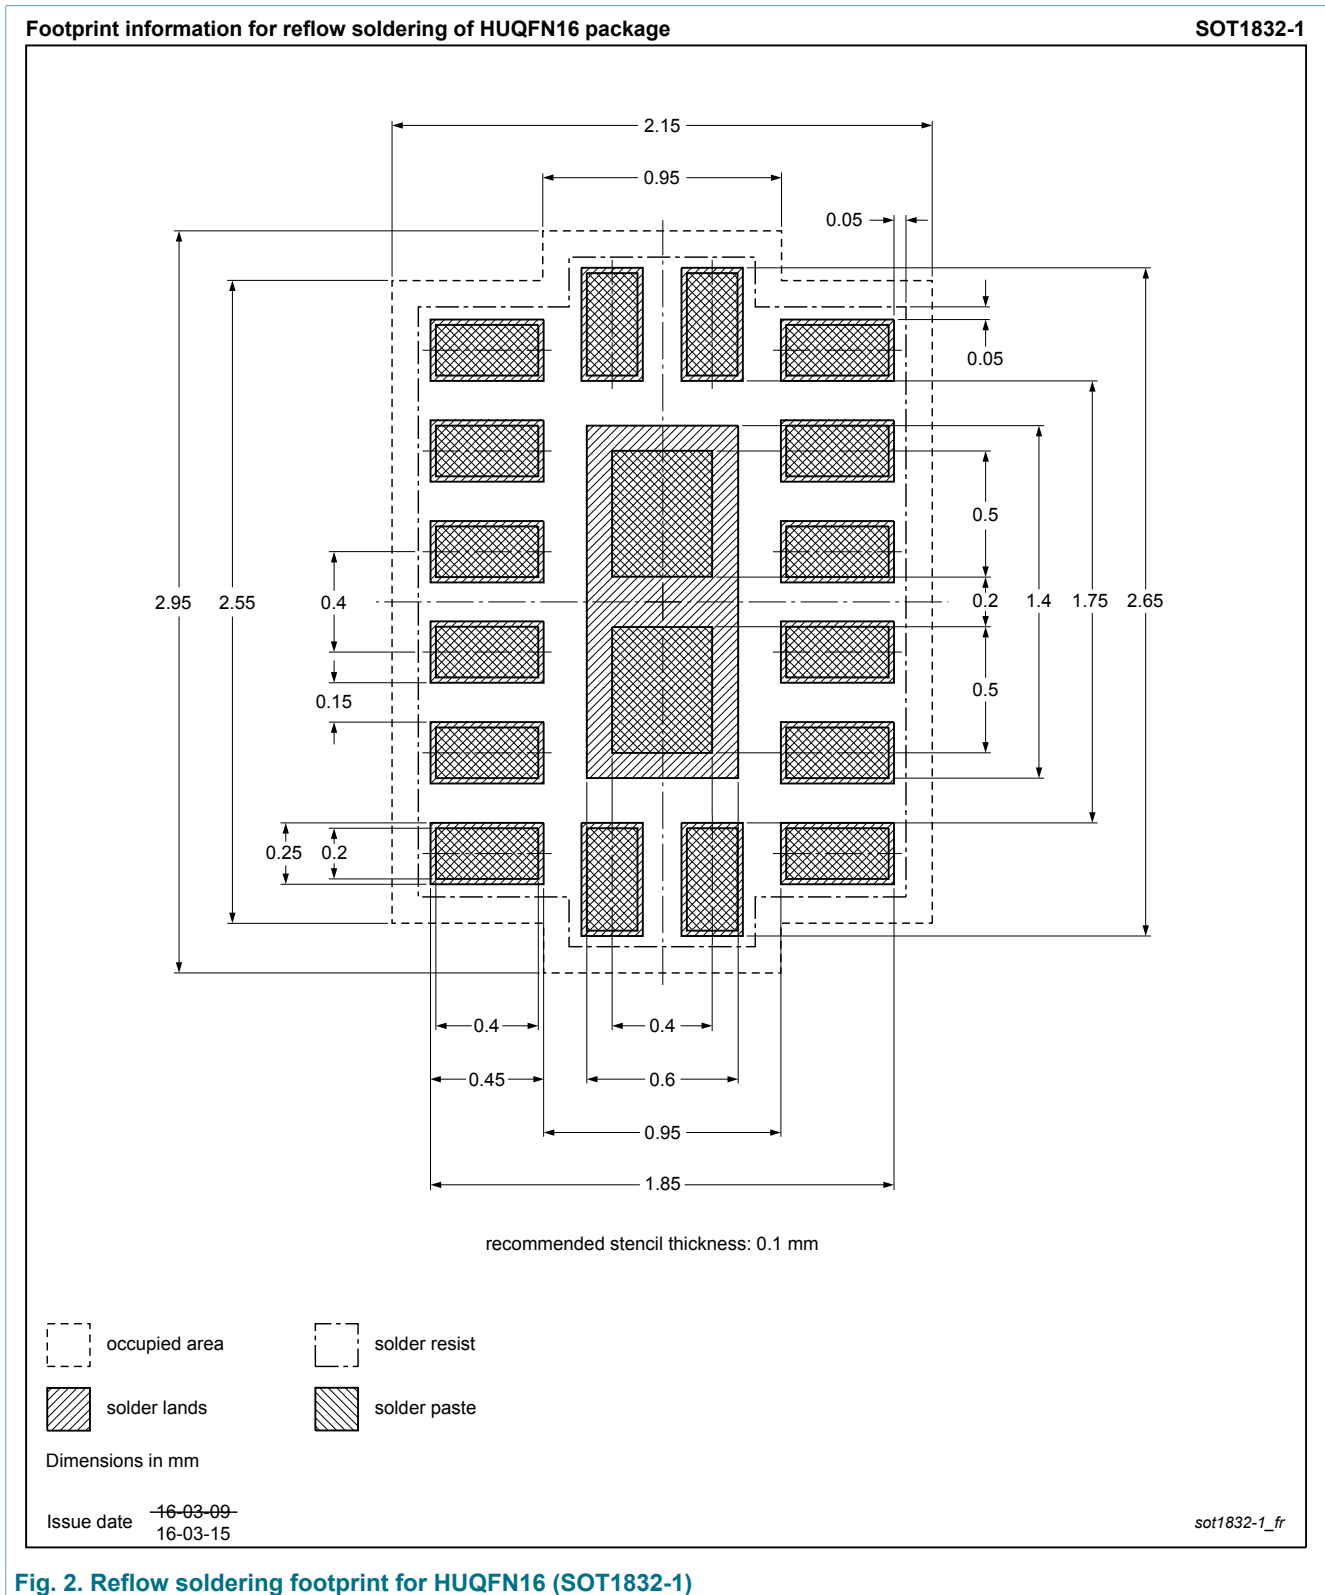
Reflow soldering footprint for HUQFN16 (SOT1832-1)
